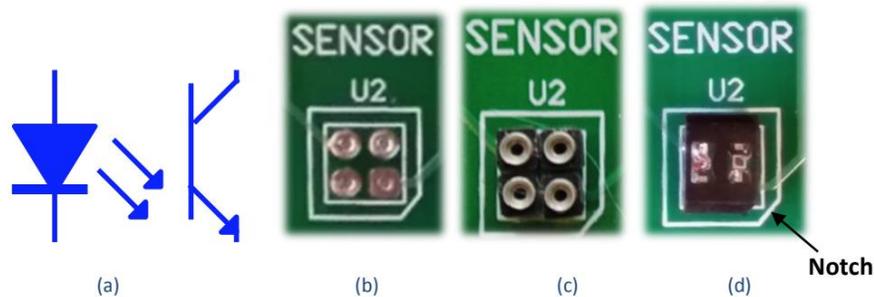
Diode and optical sensor circuit diagram symbols (a), silkscreen placement (b), sockets (c) and component (d). Take particular note that the notch on the component matches the notch on the PCB.
